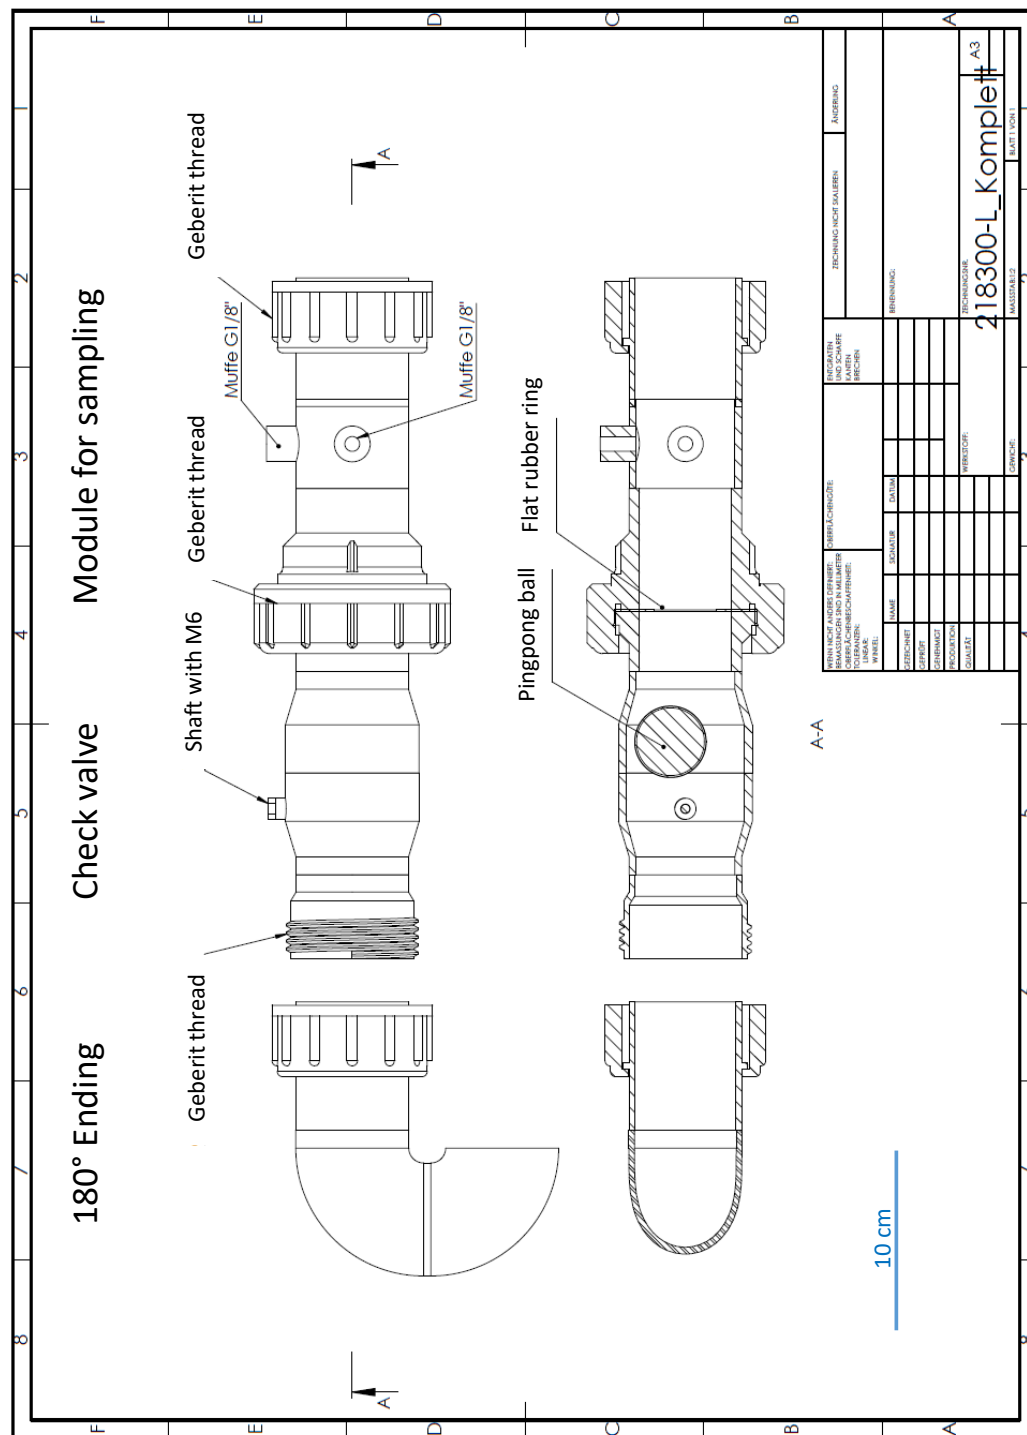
Drawing of the exhaust pipe for the flux chamber, with module for check valve.
